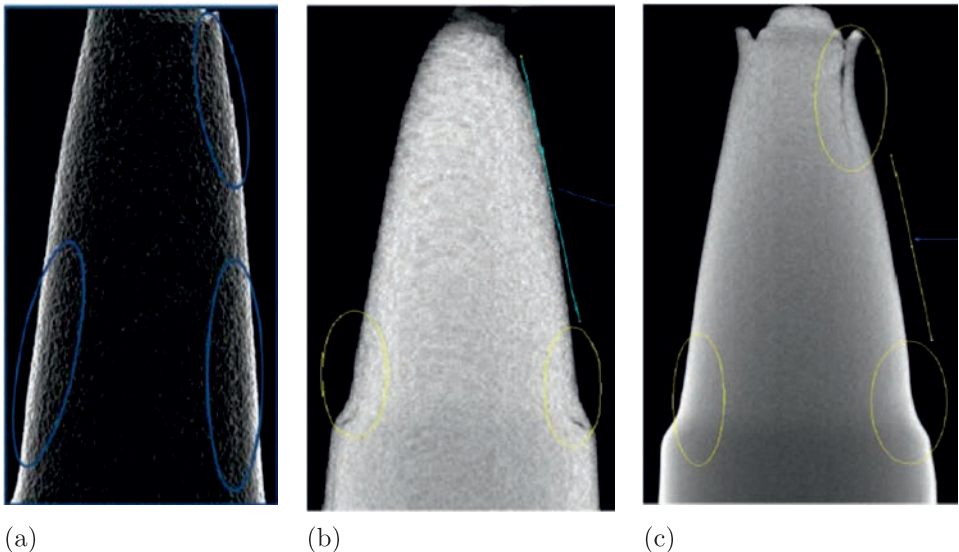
Computerized X-ray Micro-Tomography of three magnetic welded samples (D9 steel clad to SS316LN Plug).
